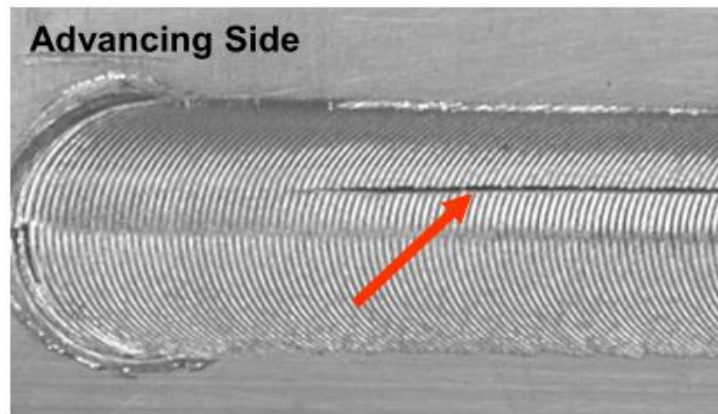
Example of Surface Lack of Fusion Occurring in Friction Stir Welds
